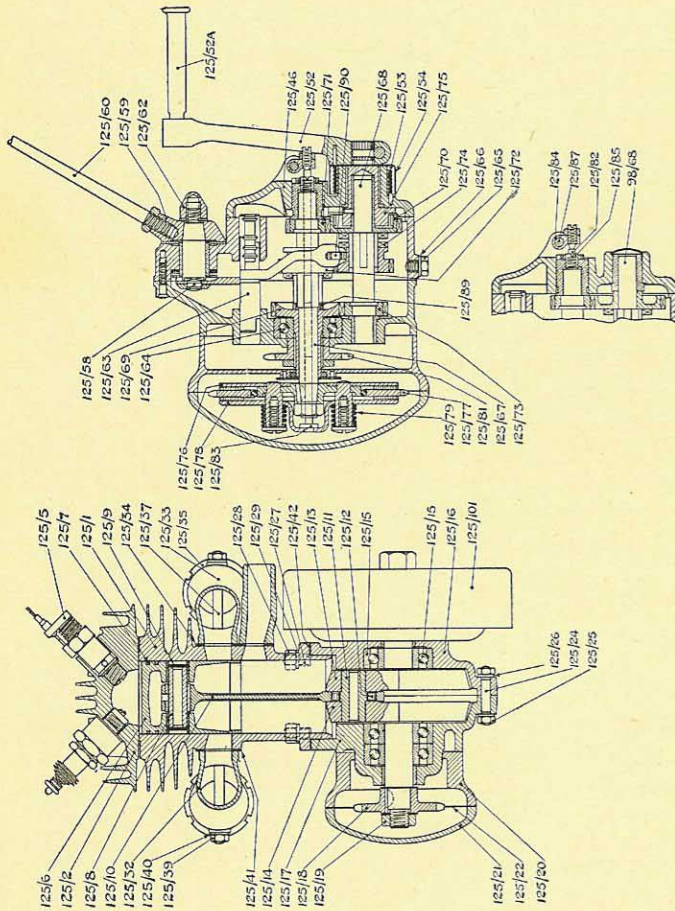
SECTIONAL VIEWS OF MARK VIII-D 125-C.C. ENGINE-GEAR UNIT.
